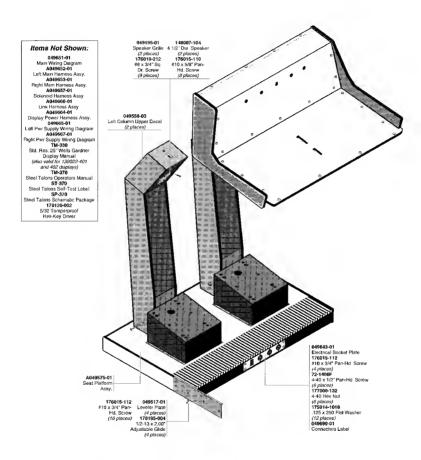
Cabinet-Mounted Assemblies, Rear View A049570-01 D
